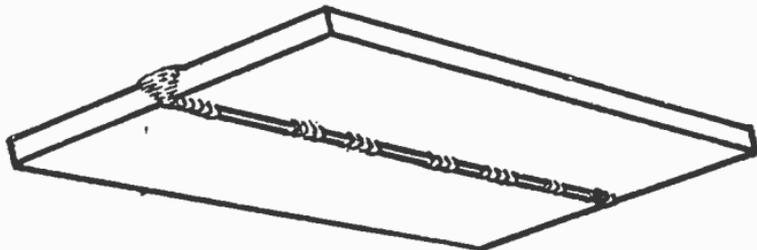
,159.—Underside of weld showing incomplete penetration.
